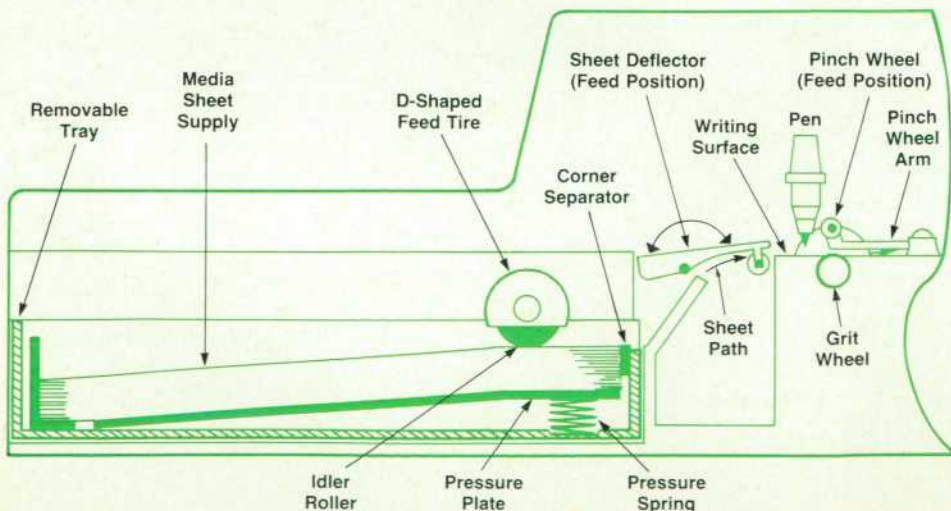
The HP 7550A Plotter's sheet-feed mechanism is similar to that of a photocopier, but with much higher alignment accuracy. It can feed up to 150 sheets without reloading.
